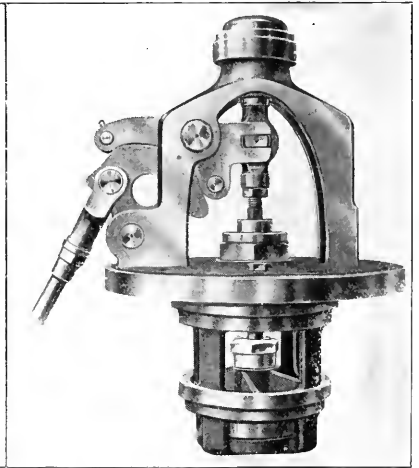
BALANCED POPPET VALVE WITH OPERATING CAM AND FOLLOWER
